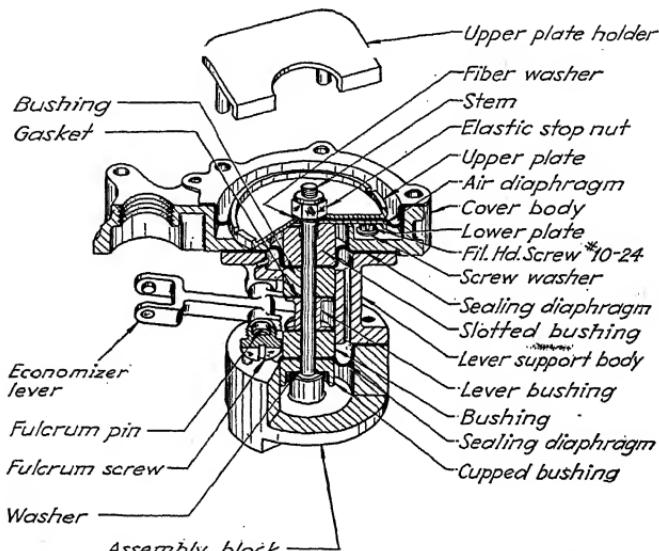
Assembly of economizer diaphragms—Stromberg.
